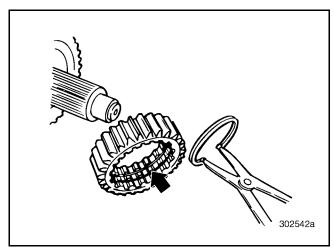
Removing Snap Ring Inside Fifth Speed Gear
